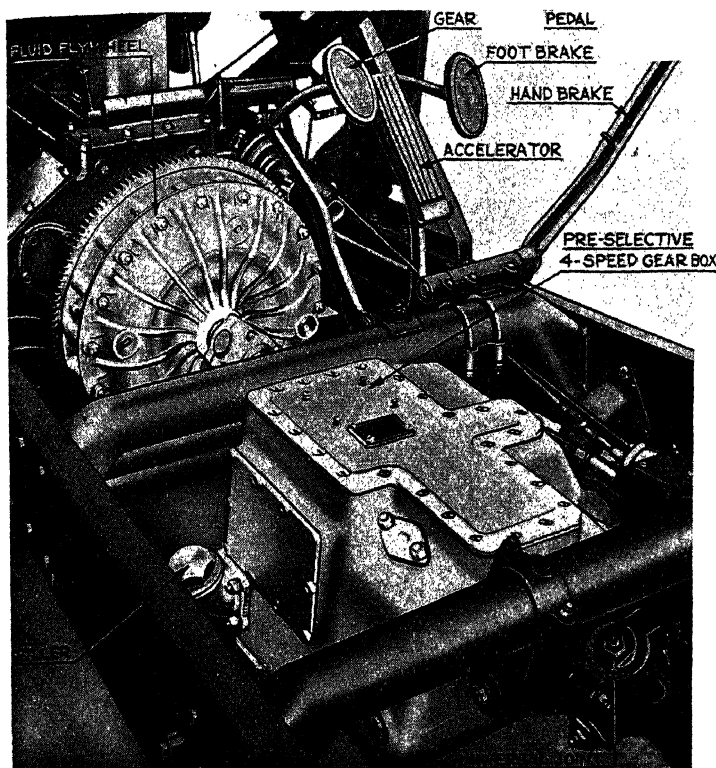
Showing Daimler Fluid Flywheel, Pre-selective Gearbox and Pedal Controls.
